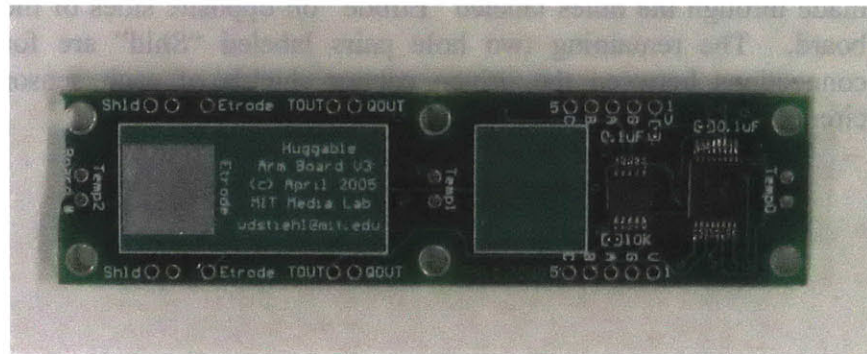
The Bottom of the Arm Sensor Circuit Board.
